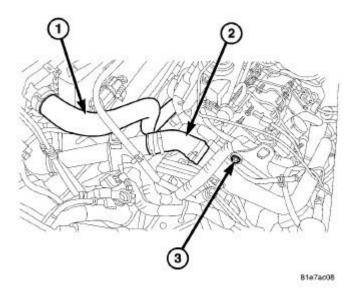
Charge Air Cooler Hoses Courtesy of CHRYSLER LLC
